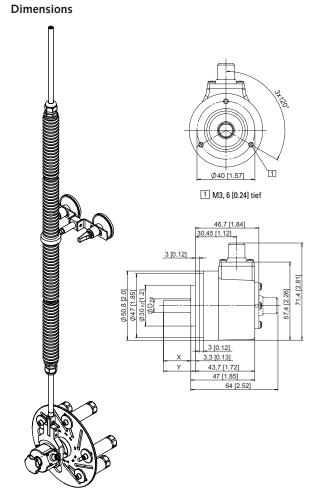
WPT sensor dimensions (left side: including holder WPT)
